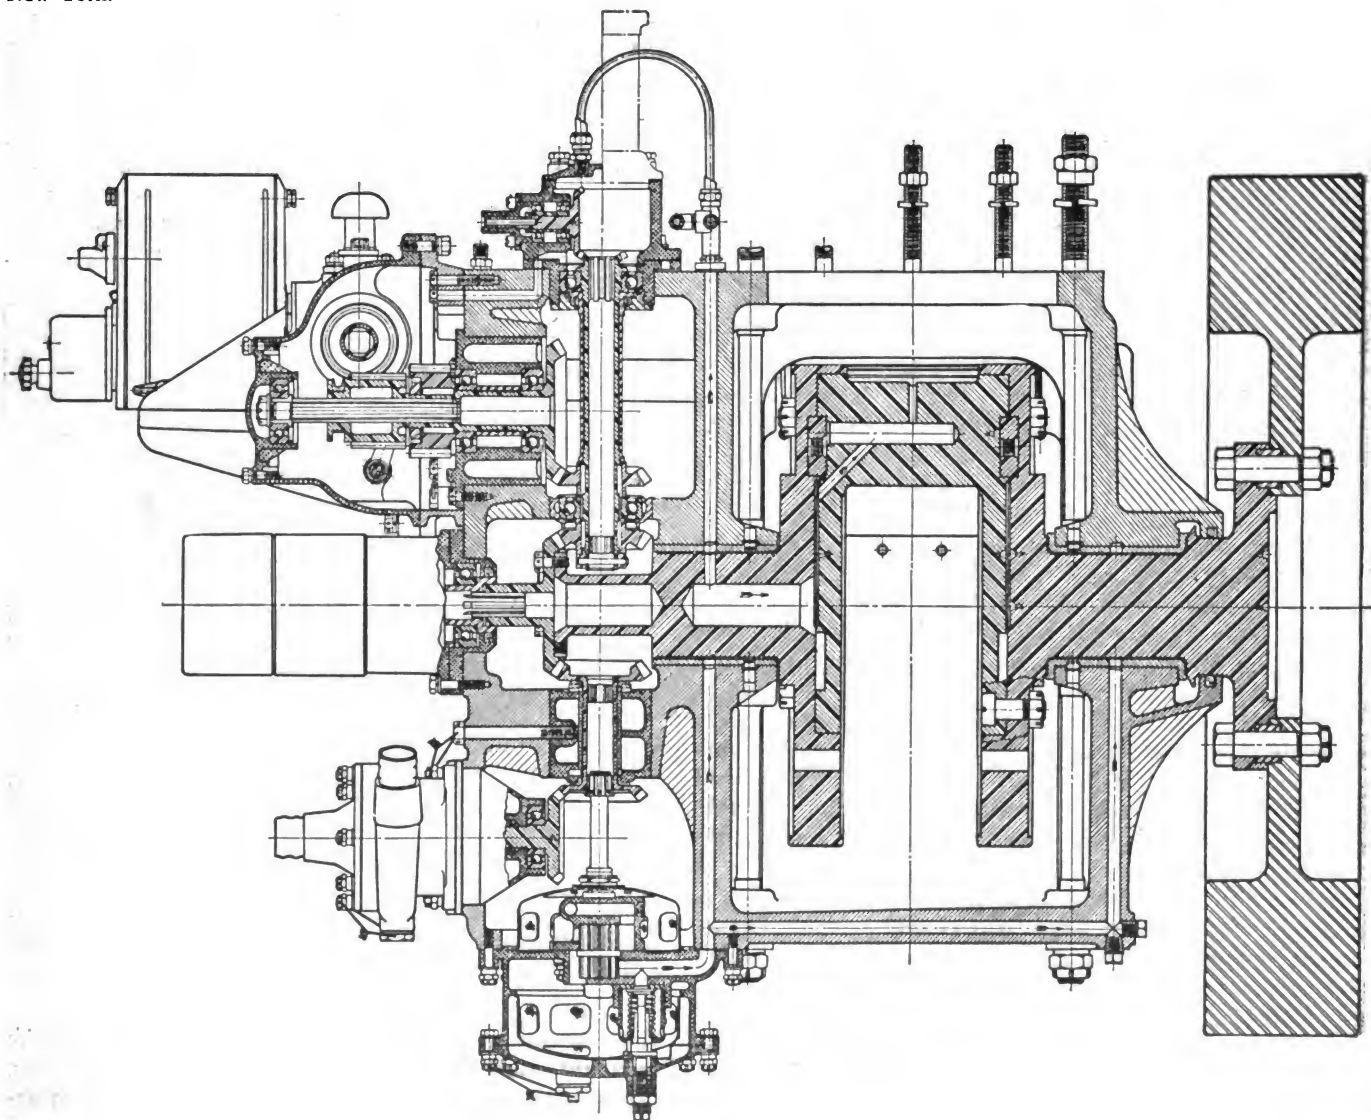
Longitudinal cross section of Universal Test Engine Showing Construction
